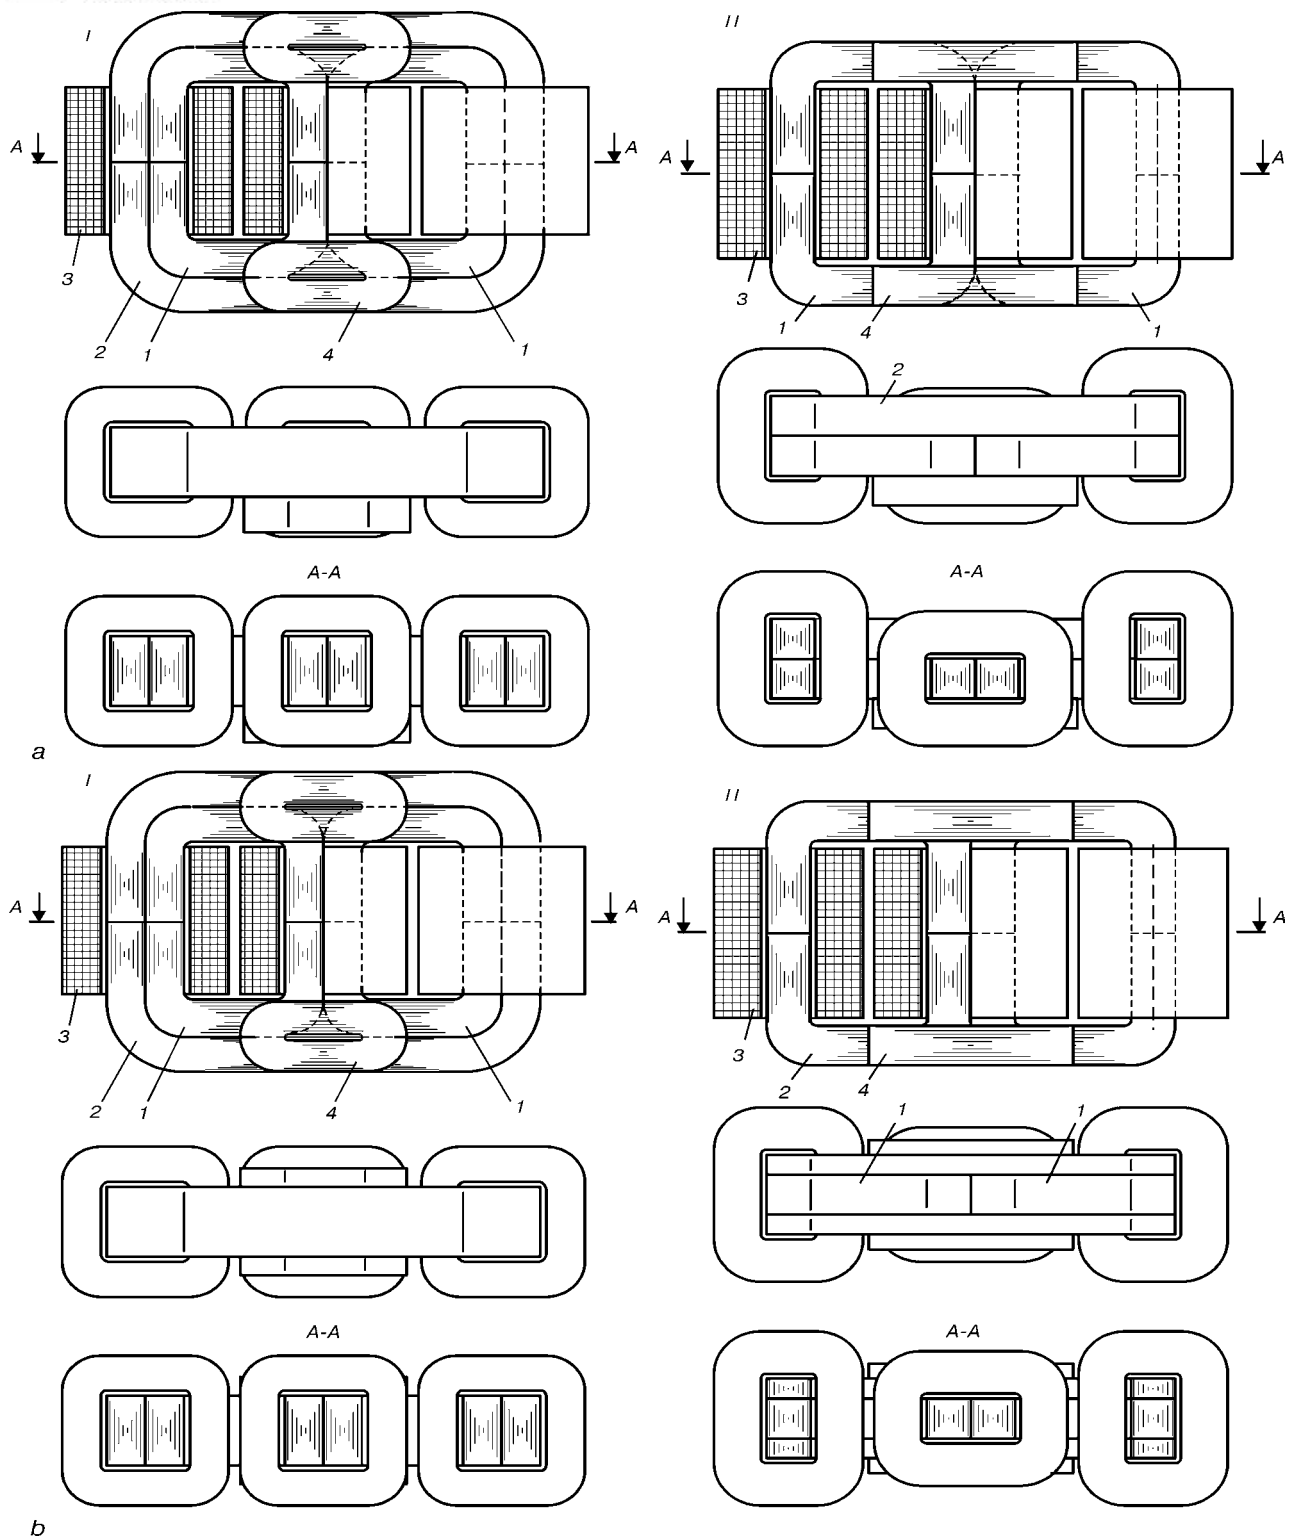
New non-symmetrical (*a*) and symmetrical (*b*) design (*I, II* — variants) of three-phase transformer with tape multicore magnetic circuit and yoke cover plates: 1, 2 — tape core-type magnetic circuits; 3 — coils with windings; 4 — yoke cover plates
